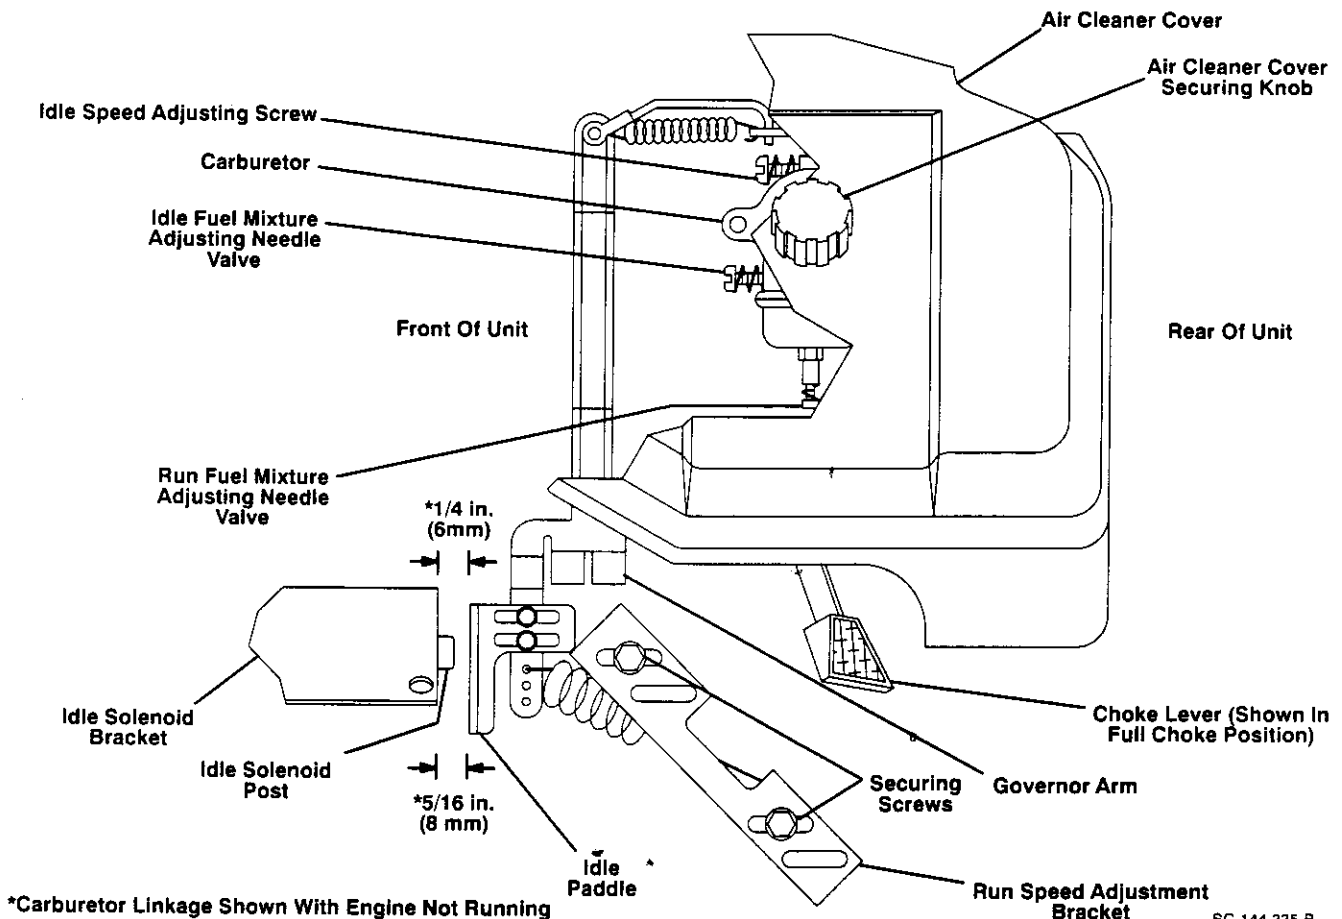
Engine Speed And Carburetor Adjustments With Components
